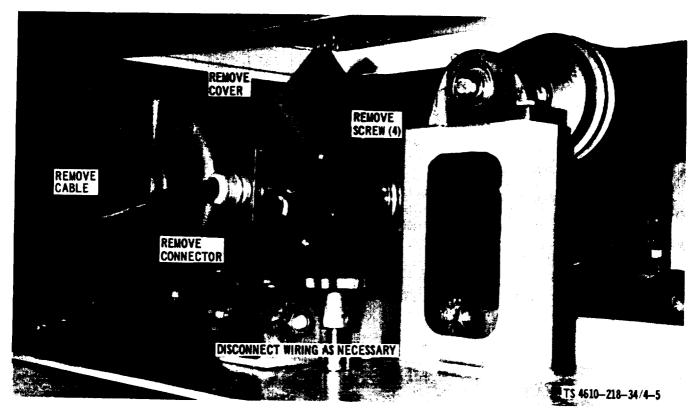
Erdlator Agitator Drive Motor Wiring, Removal and Installation
